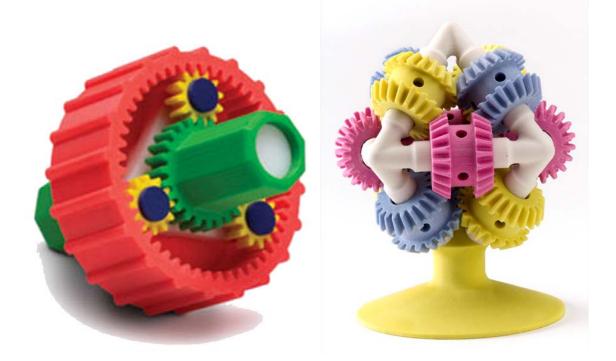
49: a) A planetary gear system [www.alpha-3d.com/English/seminar.htm]; b) A toy with moving parts [http://www.zcorp.com/imagesets/136/show.aspx]
